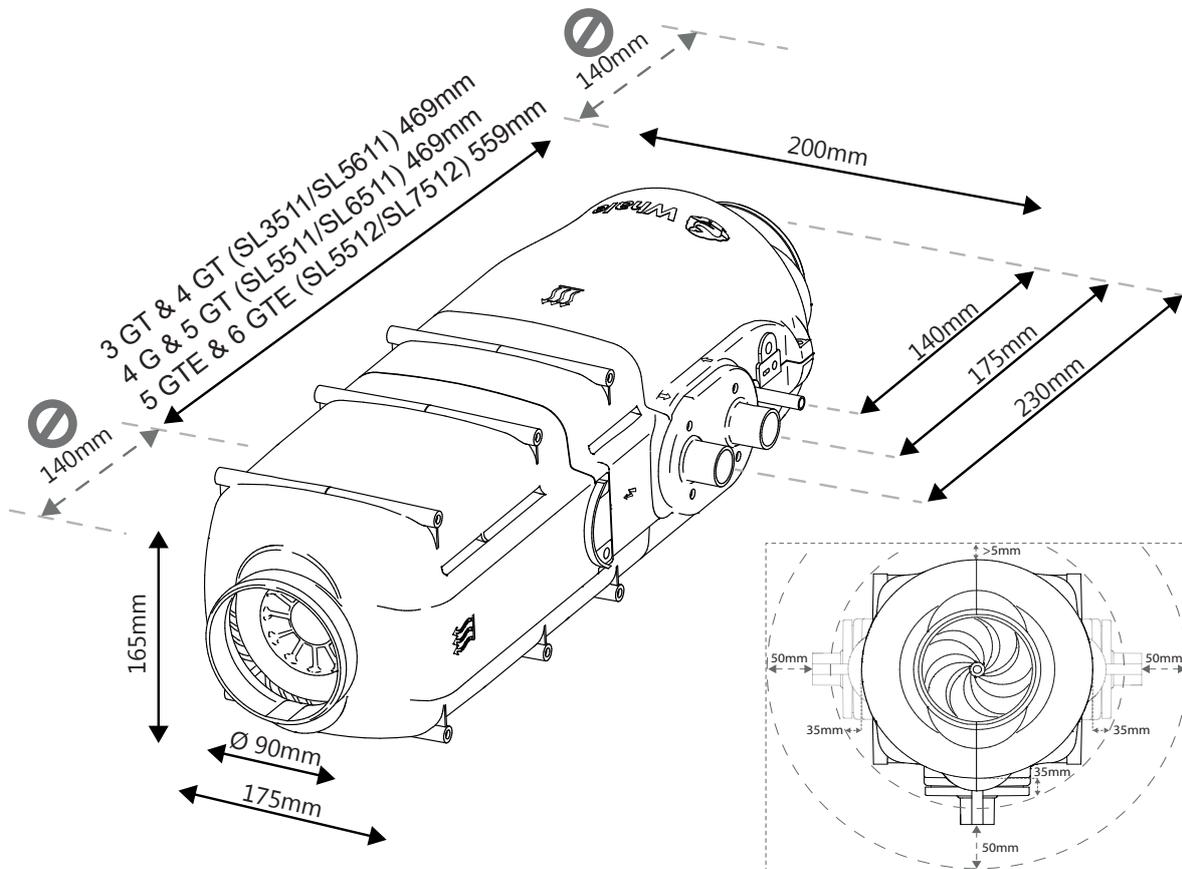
Heat Air Dimensions Including Clearance / Bild 1. Heizungsabmessungen einschließlich des Abstands /
